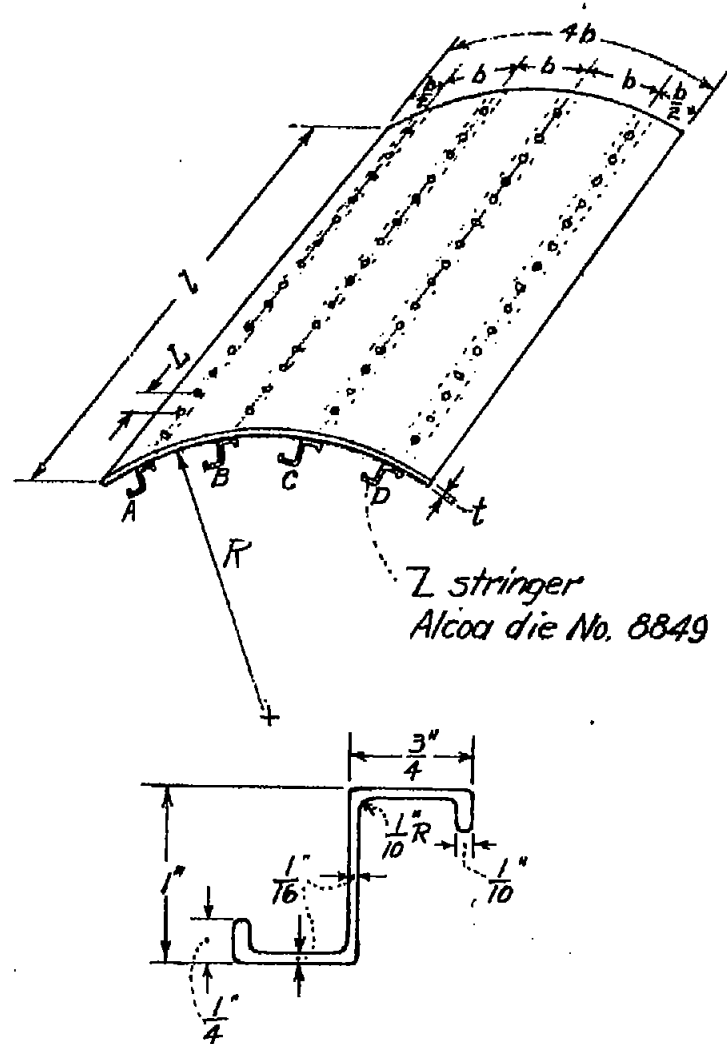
Construction of sheet-stringer panels and nominal dimensions of stringer. Stringers fastened to sheet by 1/8-inch brazier-head rivets. All material 24S-T aluminum alloy.
